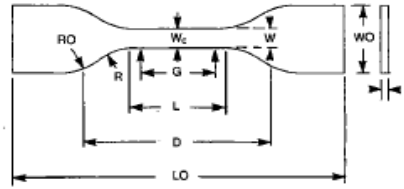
5: Dimension of tensile test specimen for aluminium (ASTM E8)
